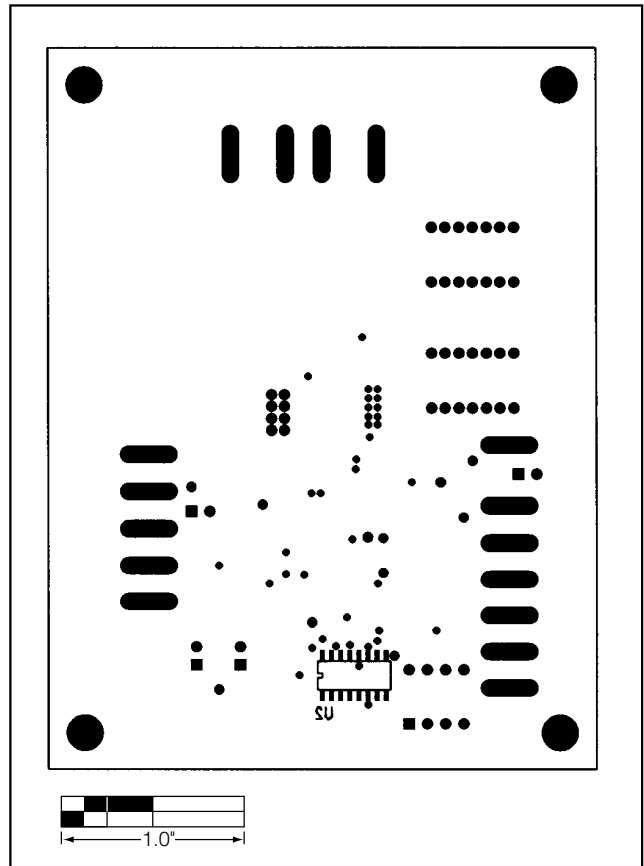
MAX1636 EV Kit Component Placement Guide—Solder Side
